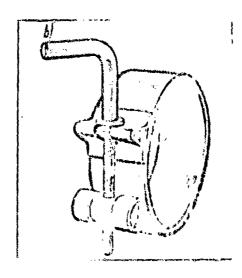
Device for installation of the piston with its rings in the cylinder:
